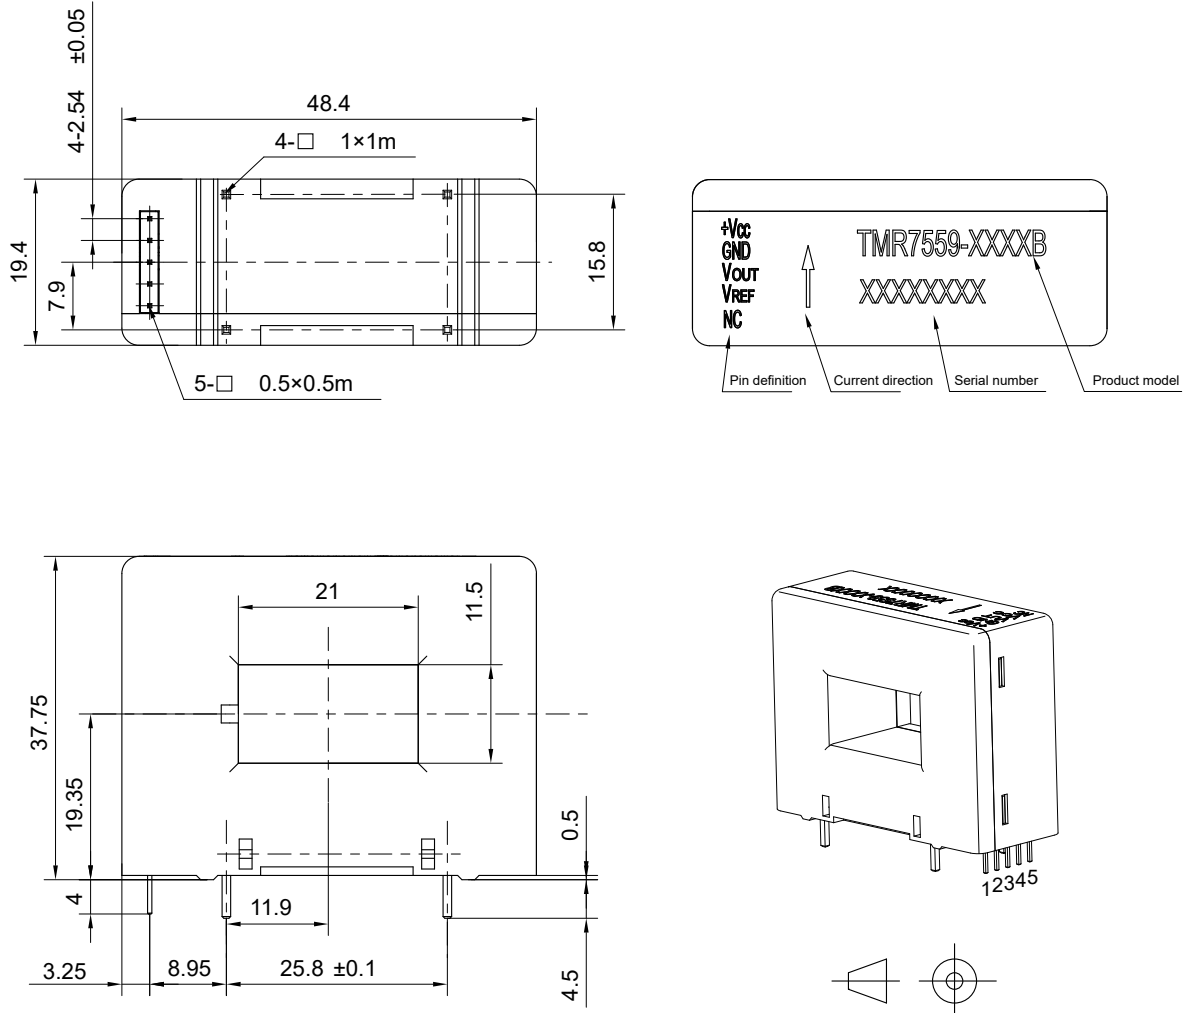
Dimension (unit: mm, tolerances for unmarked scales ±1 mm)
